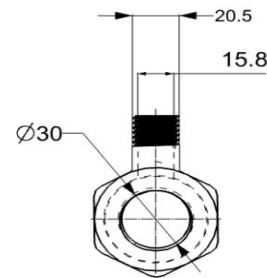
Hot End Side View, Where The Hold End Leaves The Rhvt Out Of The Tube
